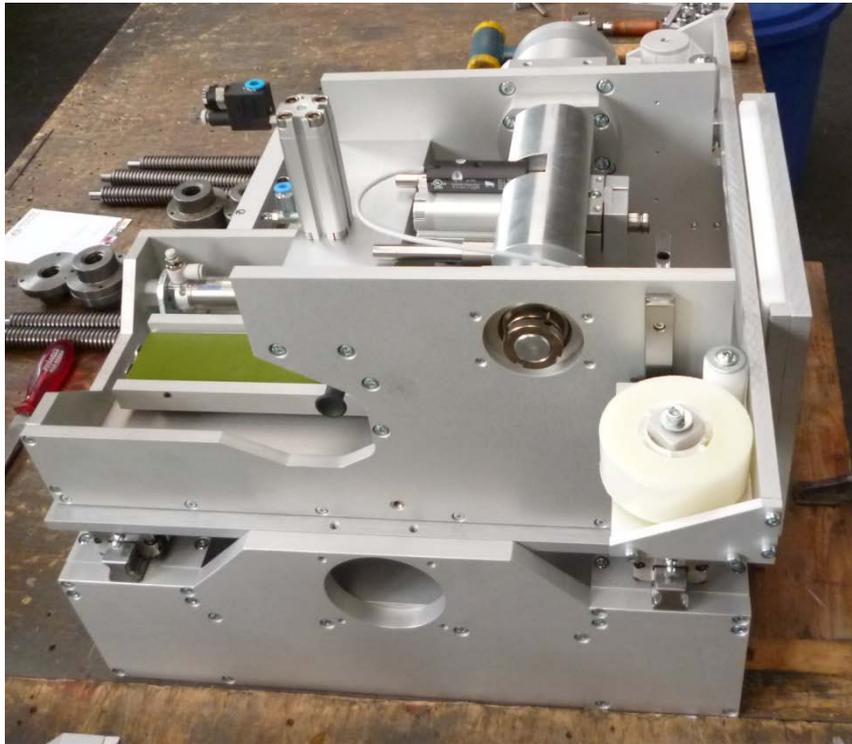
Pad printing head TAMPONCOLOR® TC 60 SH/G-TPR
